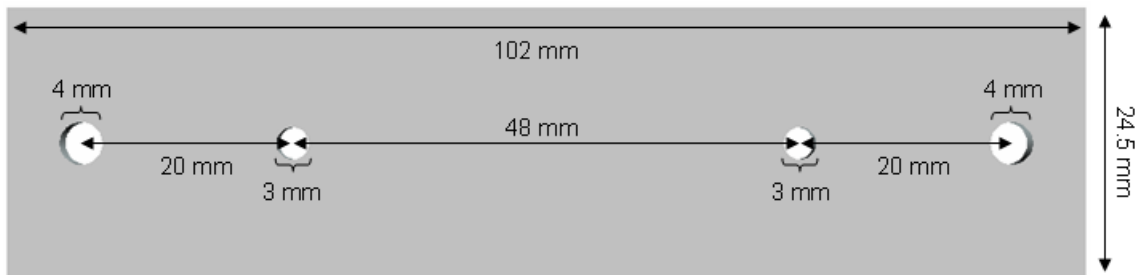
Top View of Chassis/Helicopter Mounting Adapter
